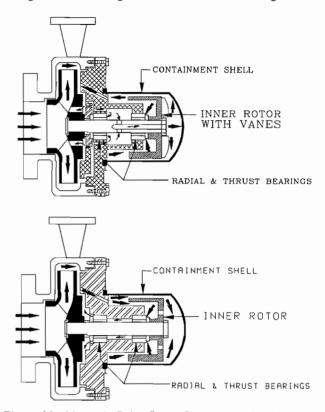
Magnetic Drive Pump Containment Shell and Can Internal Flow Path Discharge to Discharge.
